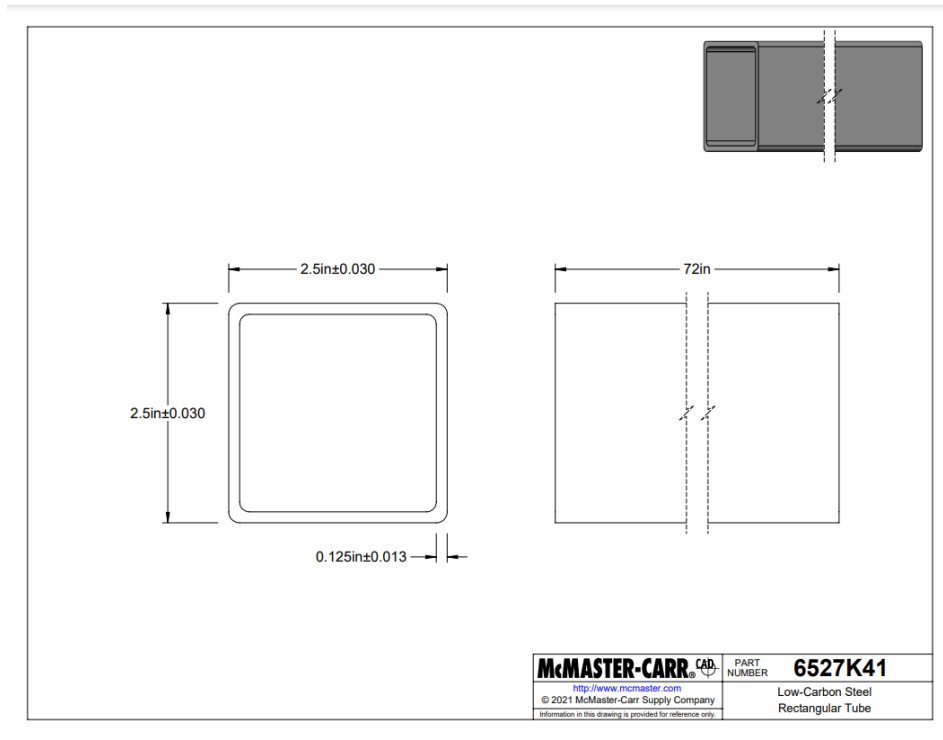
Drawing of Low-Carbon Steel Rectangular Tube Used as Truss Beams for Base, Mid, and Sections of Ladder and Basket, Angular Lift, and Attachment Subsystems Provided by McMaster-Carr
